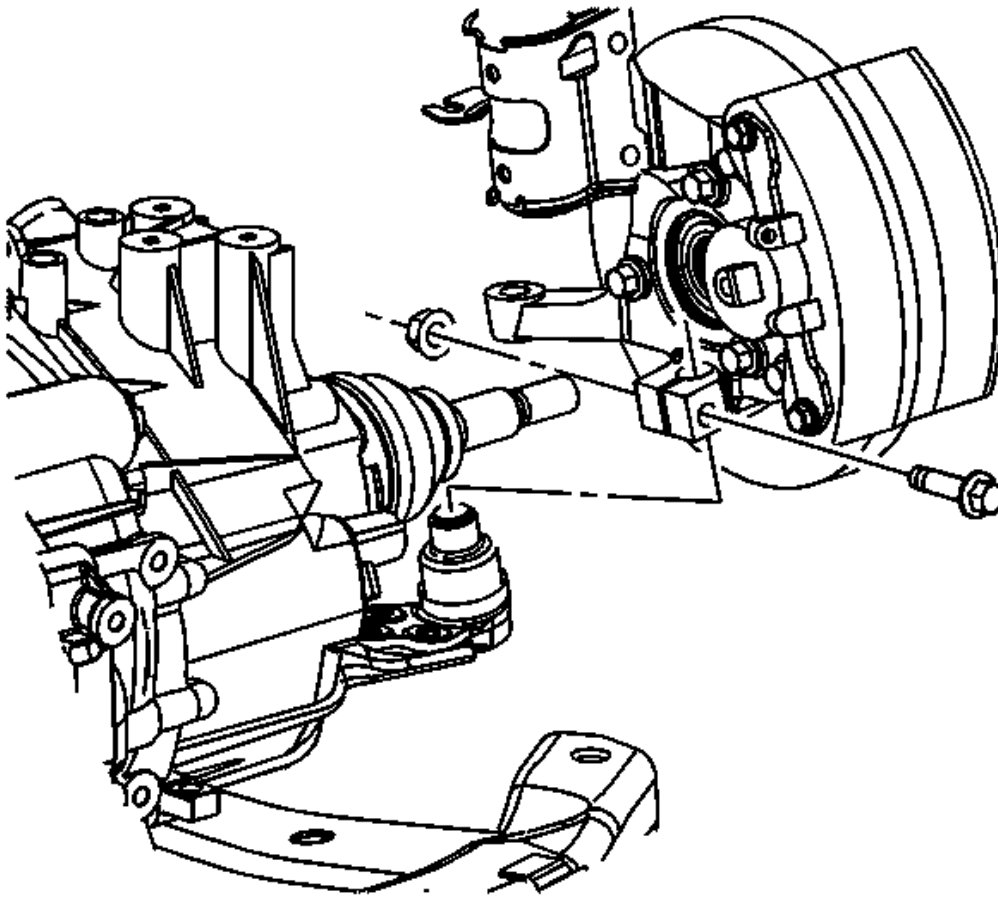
Identifying Lower Control Arm Ball Stud-To-Steering Knuckle Pinch Bolt
